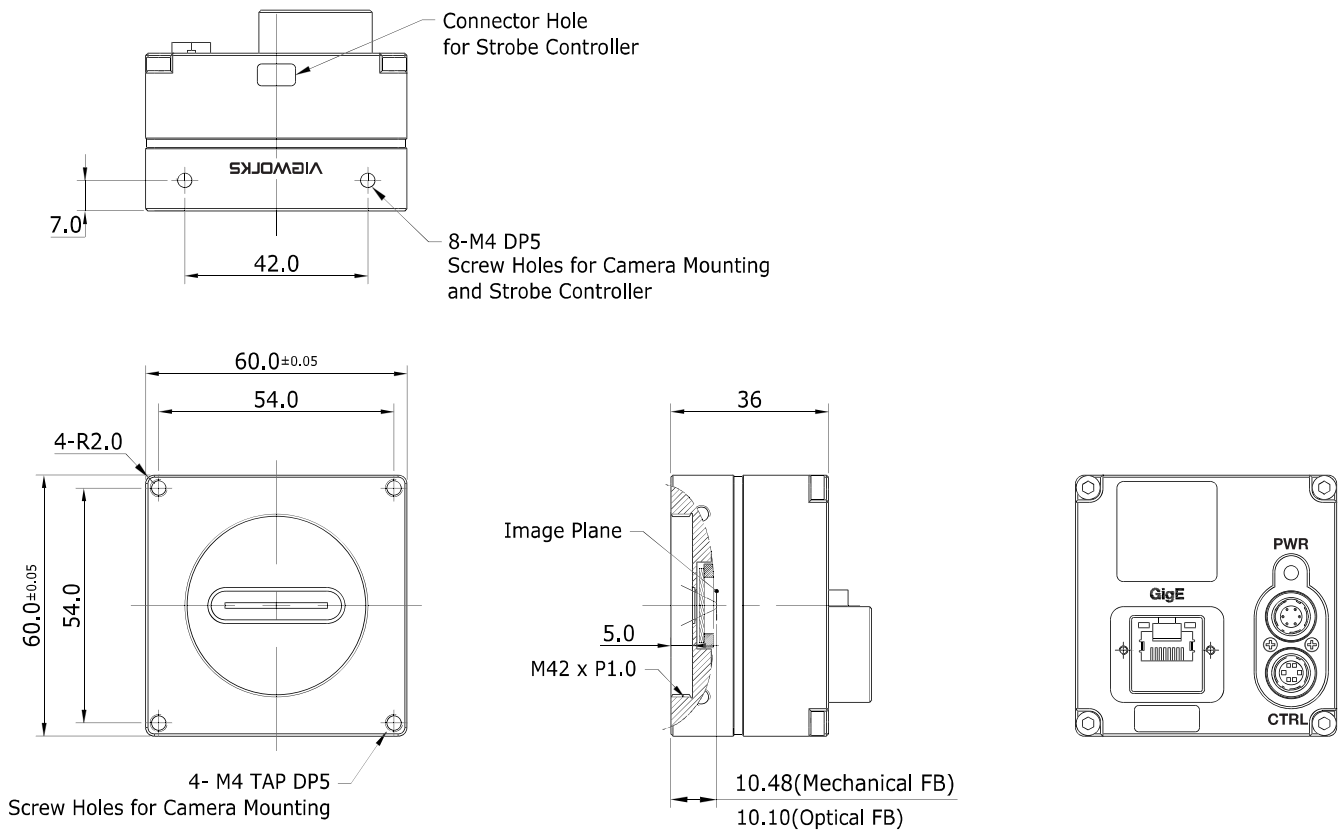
VT M42 GigE Camera Mechanical Dimension
